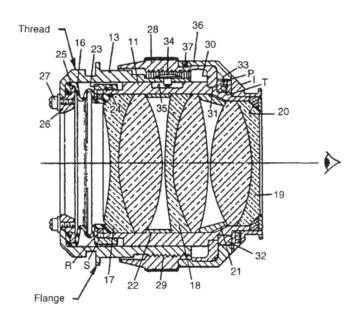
Typical construction of a more complex eyepiece for a military telescope. In this design, the lenses translate instead of rotate to focus. (From Quammen et al.²⁹)
